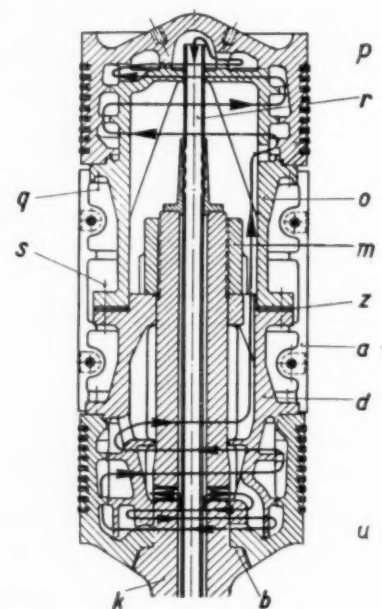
PISTON, A.E.G.-HESSELMAN DIESEL ENGINE
